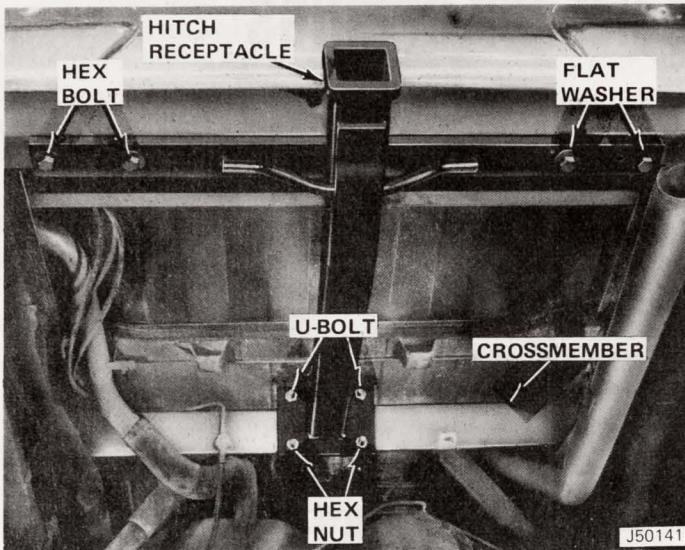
Class III Equalizing Hitch Receptacle Installed
